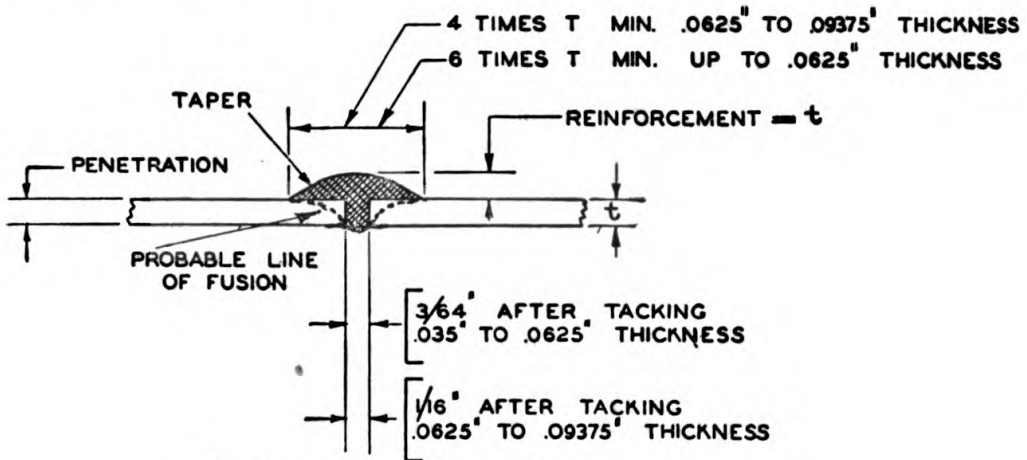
Weld metal specifications for butt joints.
